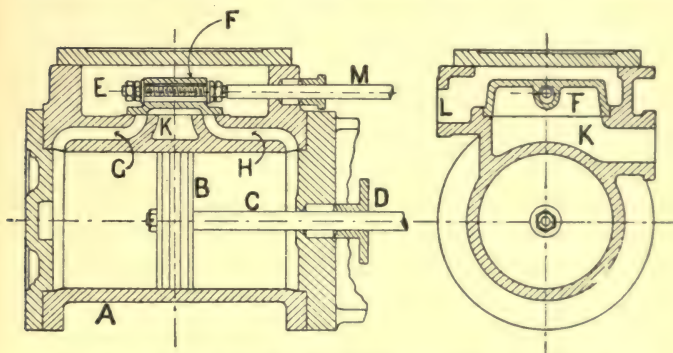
Sectional side and end elevations of a steam engine cylinder.
